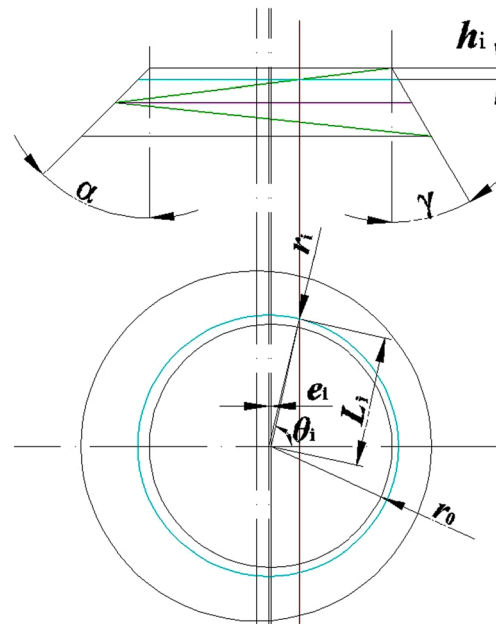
Schematic diagram of the roller path in 360° rotated by the spindle
